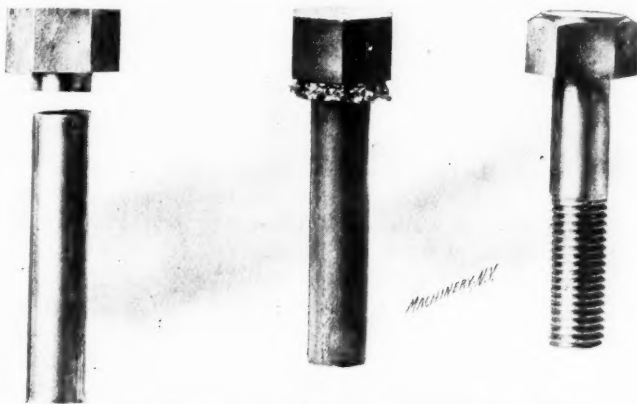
, 2, and 3. A Poppet Valve made by electrically welding a Carbon Steel Stem to a Nickel Steel Head.
